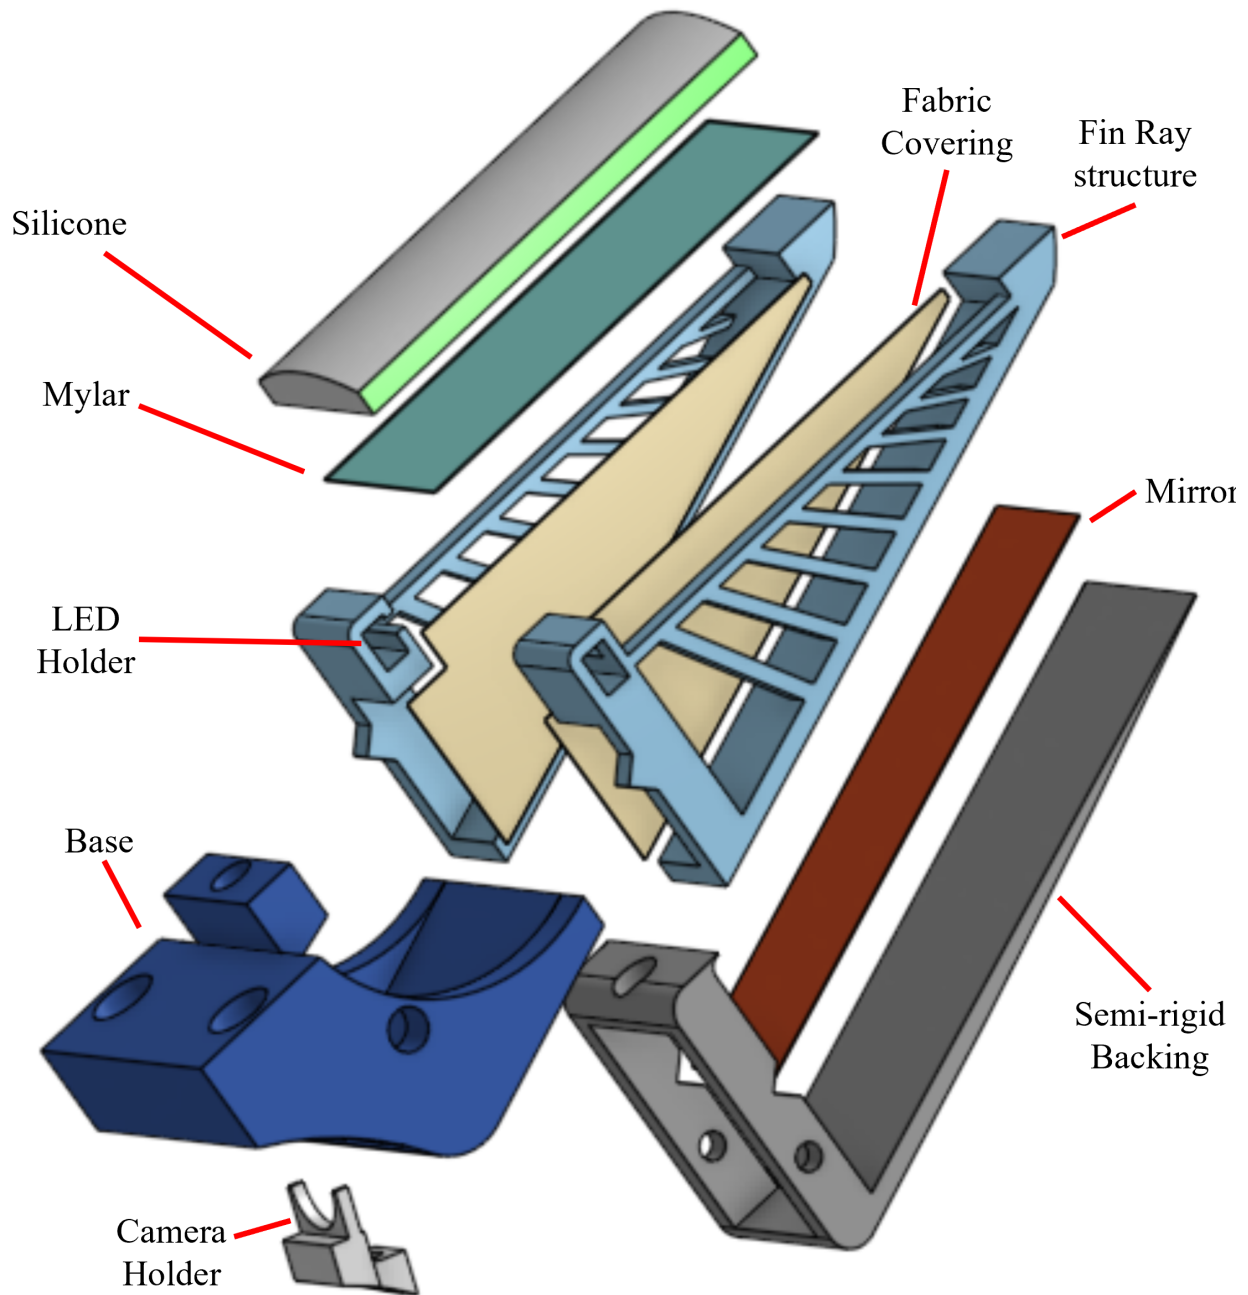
An exploded view of the Baby Fin Ray assembly. Not pictured are the camera, LEDs, and the diffuser [15].
